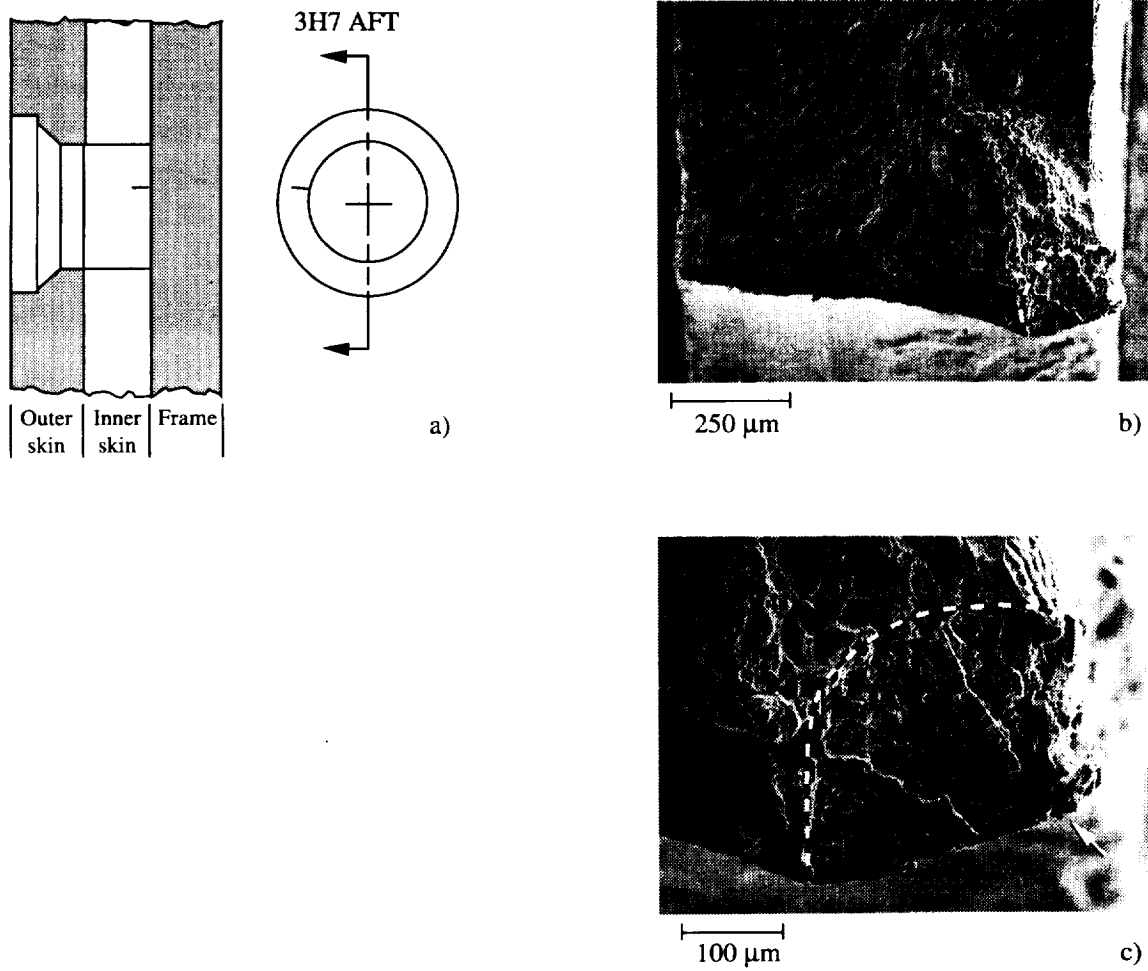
a) The schematic shows the rivet hole 3H7 configuration and the location of the inner skin fatigue crack oriented in the aft direction above the 9 o'clock position. b) The SEM micrograph shows the fatigue crack at the inboard corner of the rivet hole. The dashed line marks the fatigue crack front. c) The SEM micrograph shows the region of crack initiation (arrow) at the inboard corner of the rivet hole. The dashed line marks the fatigue crack front.
